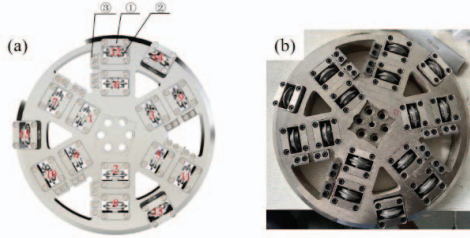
Cutterhead: (a) schematic structure and disc cutter numbering diagram: ①-cutter seat; ②-disc cutter; ③-scaper, (b) Assembly of the cutterhead
